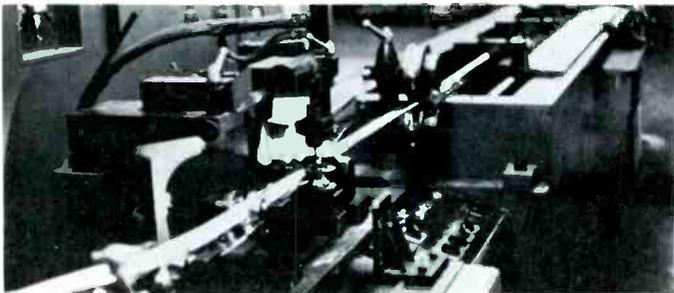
Machine applying welded outer conductor over foamed cable core.
